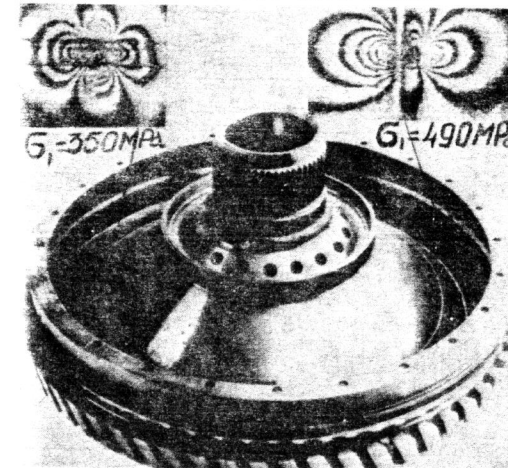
Interference fringe pattern in the gas turbine engine component being electron beam welded.
